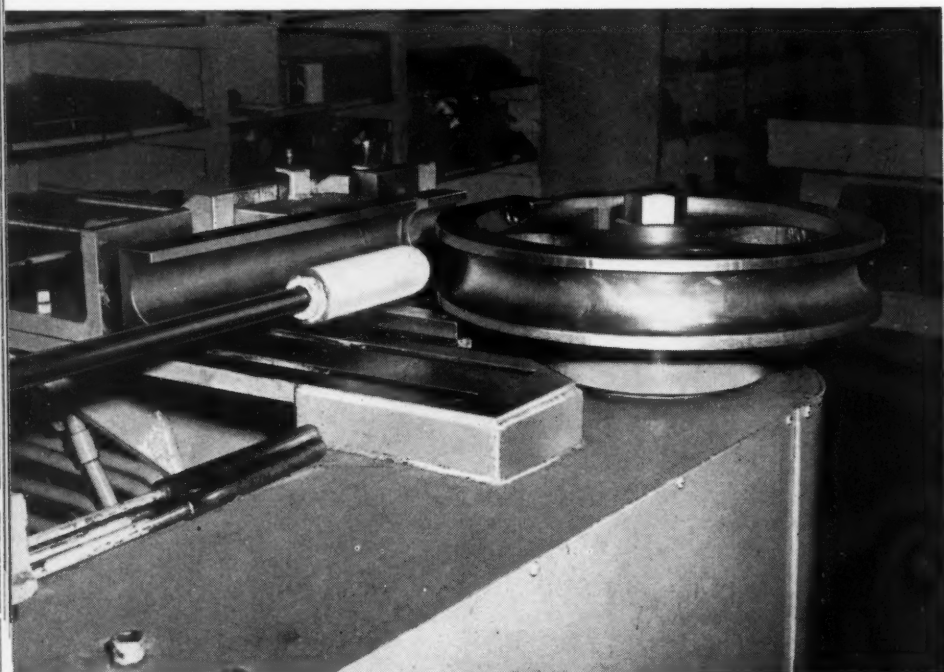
Plastic tube-supporting mandrel, cast about a threaded steel insert, prevents wrinkling of aluminum tubes during bending
